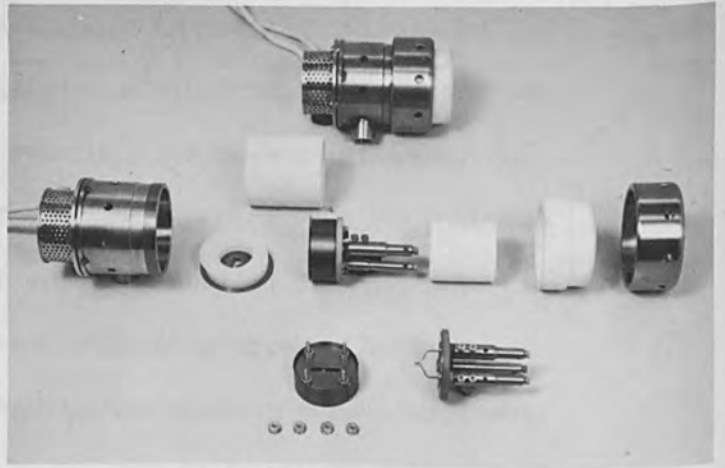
FIG. VI. ASSEMBLED AND DISASSEMBLED VIEWS OF ELECTRON GUN
